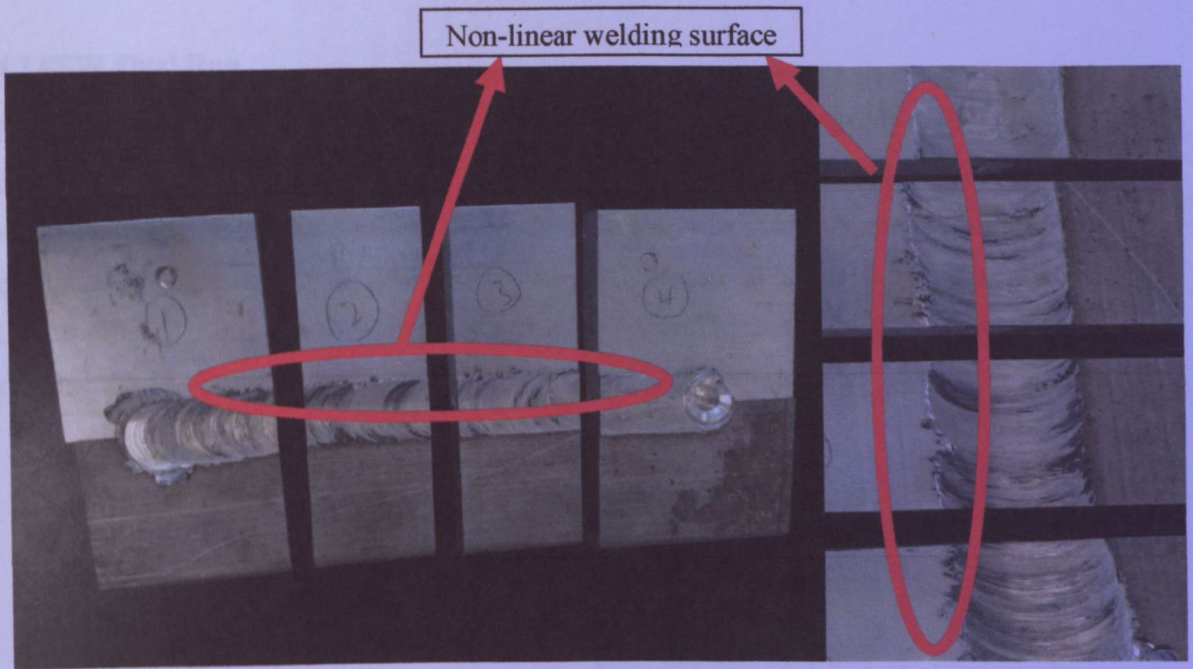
Welded plate of trial run after EDM cutting into 4 pieces
